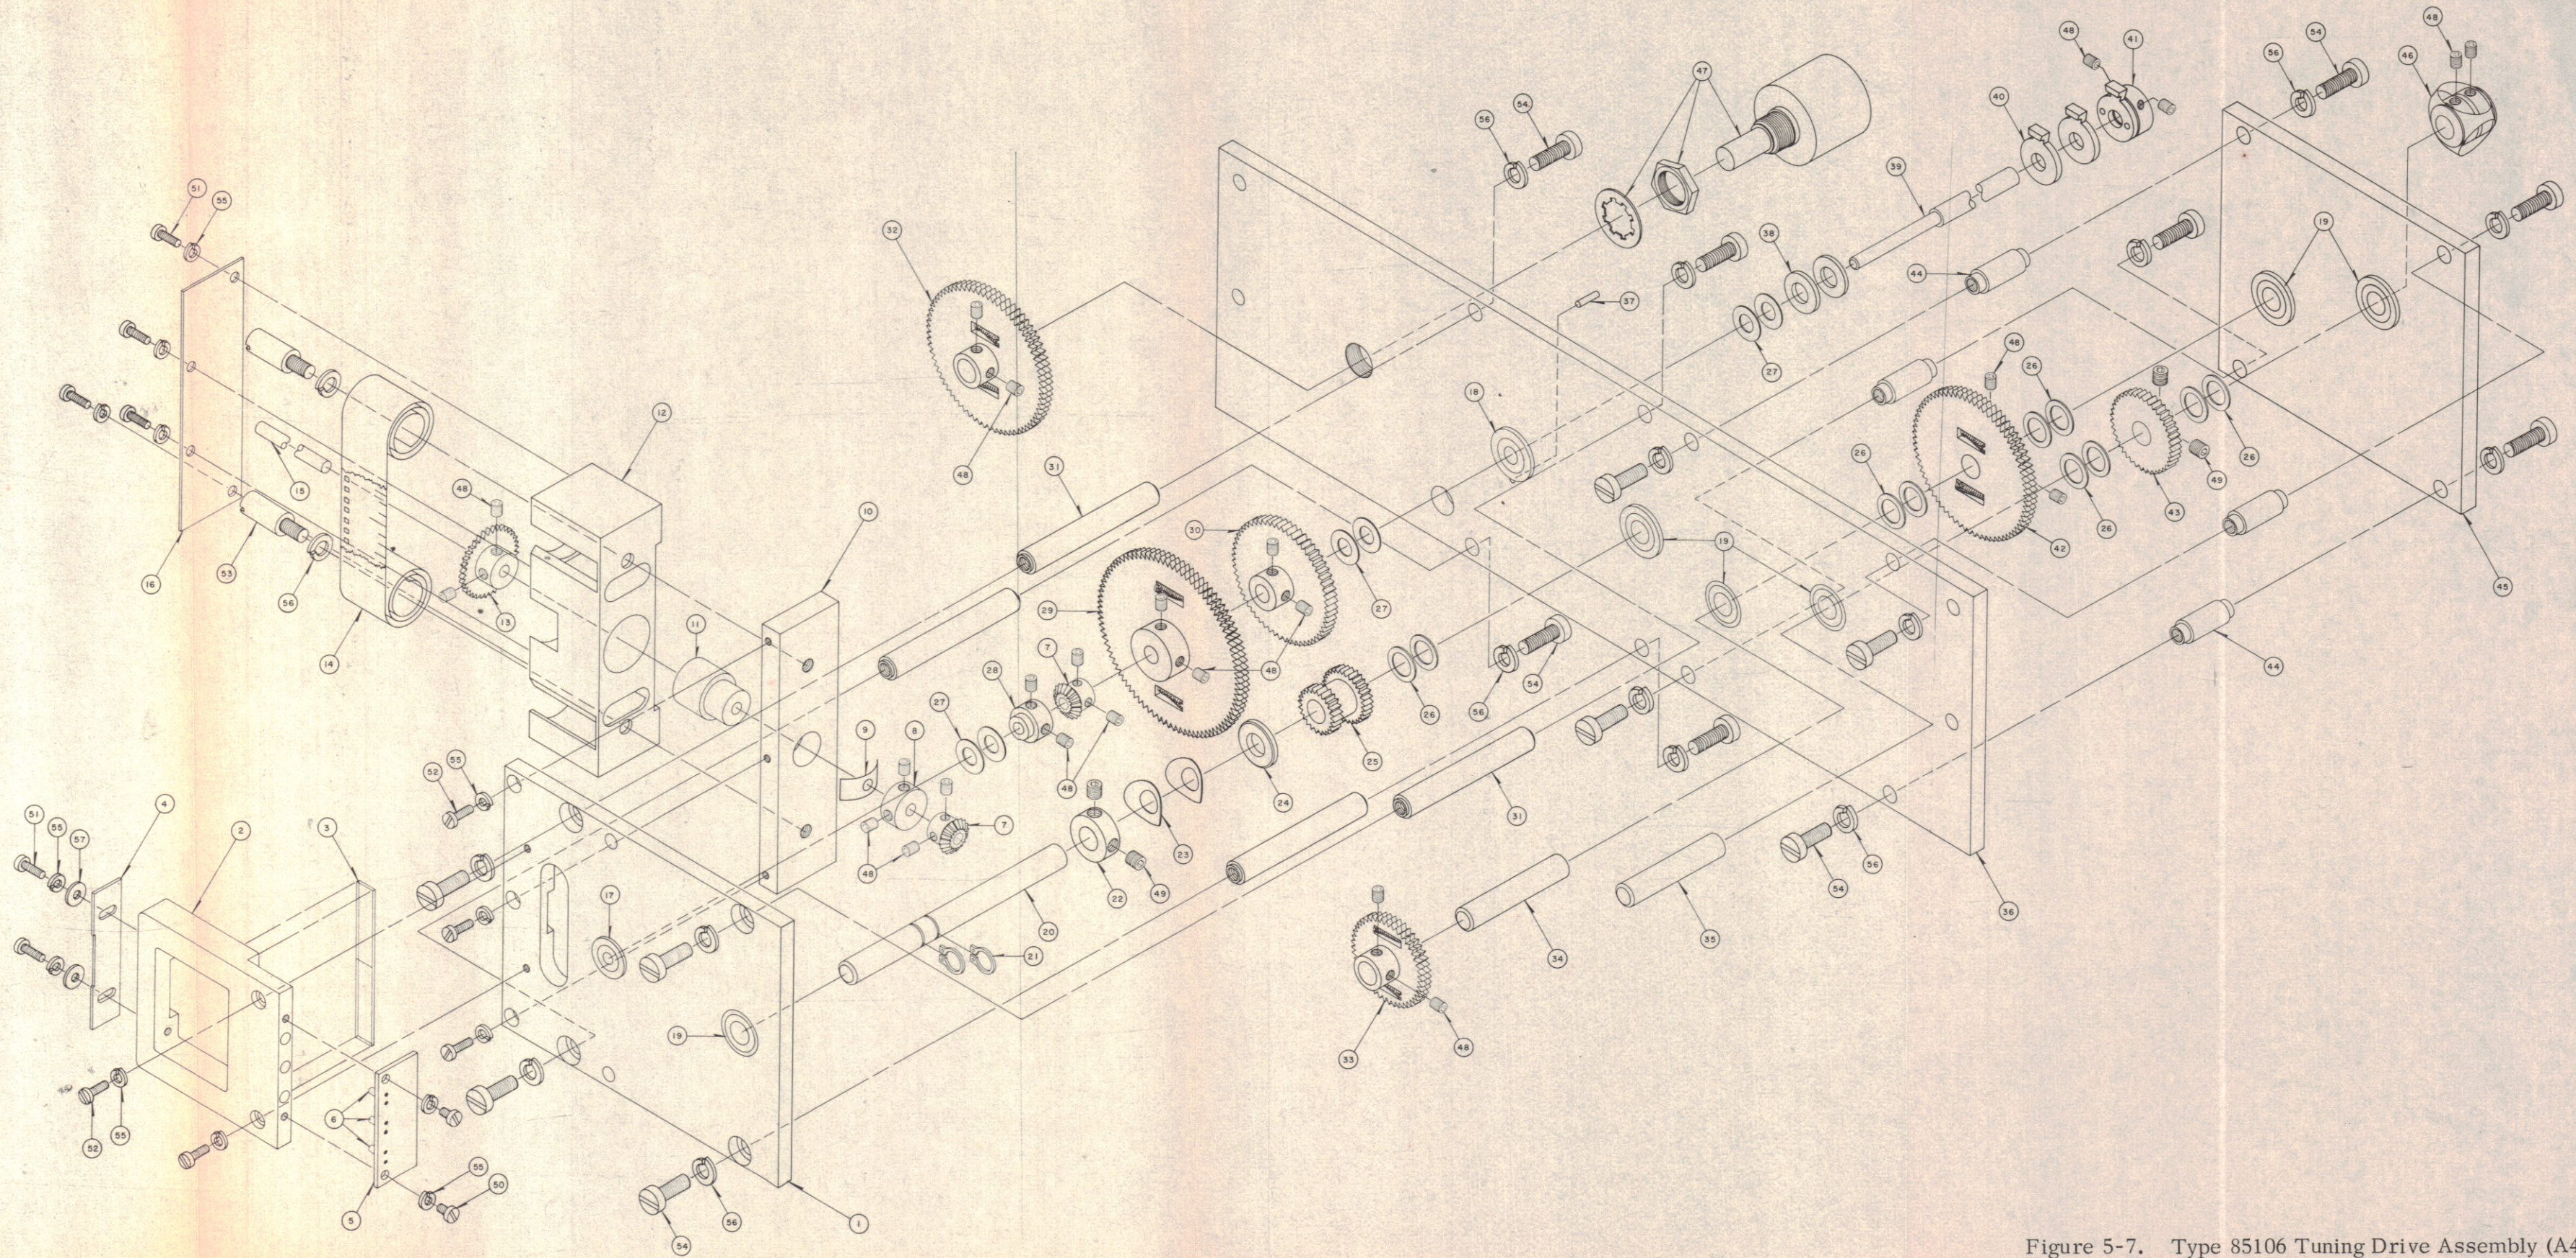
Type 85106 Tuning Drive Assembly (A4),
